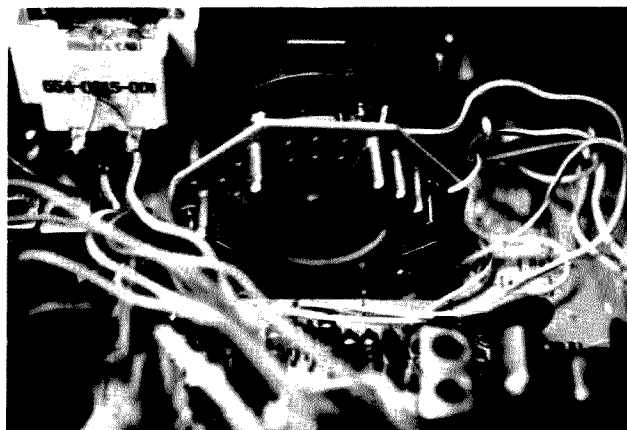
The crystal bank PCB should be removed for easy access to the crystals.
